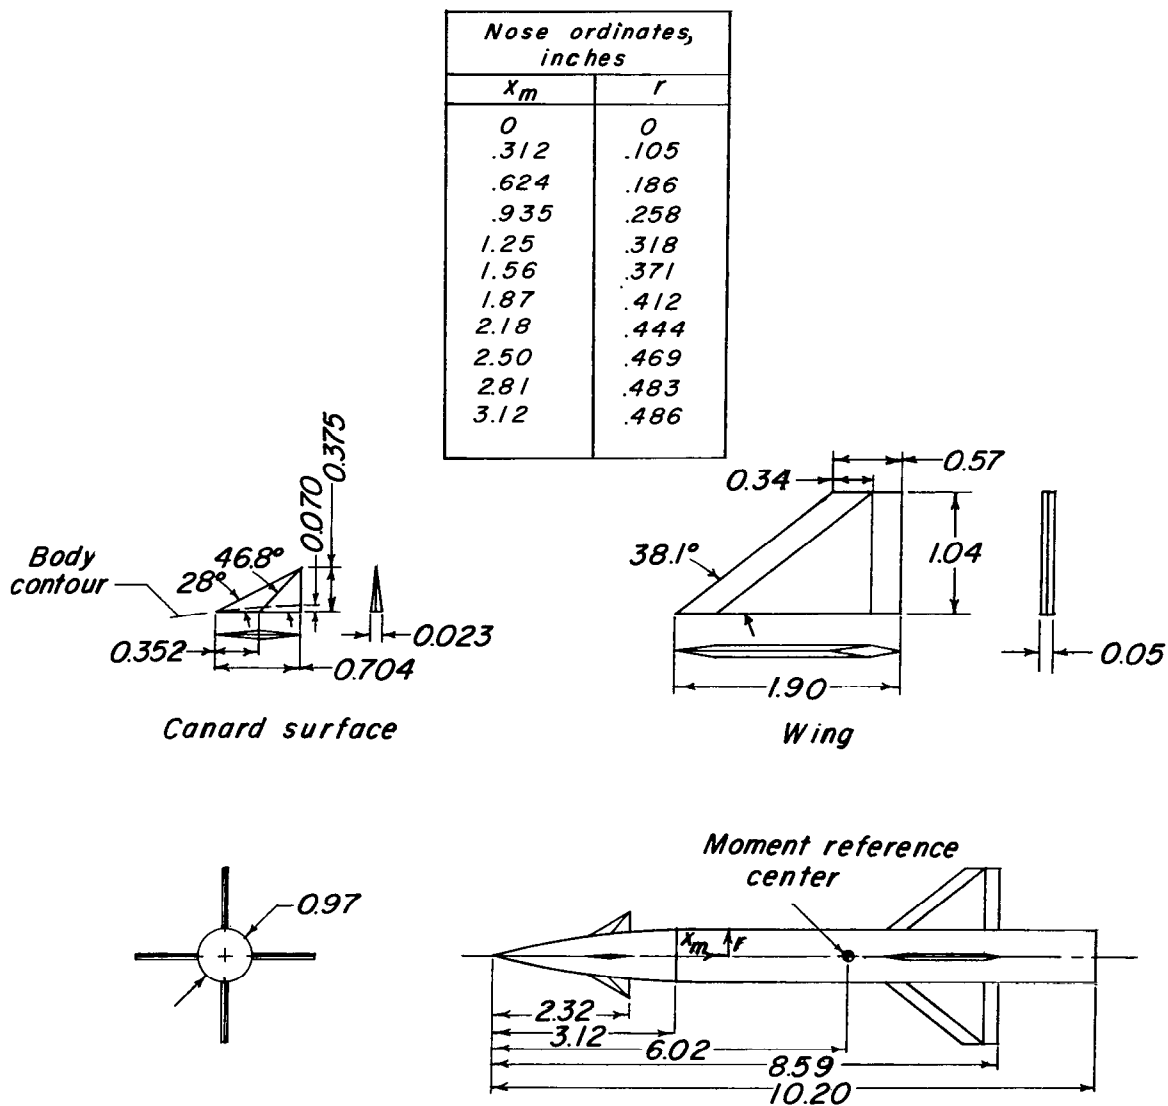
Drawing of missile model. All linear dimensions in inches.
